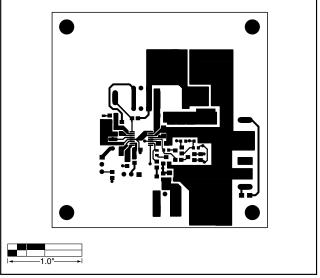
MAX1748 EV Kit PC Board Layout—Solder Side
